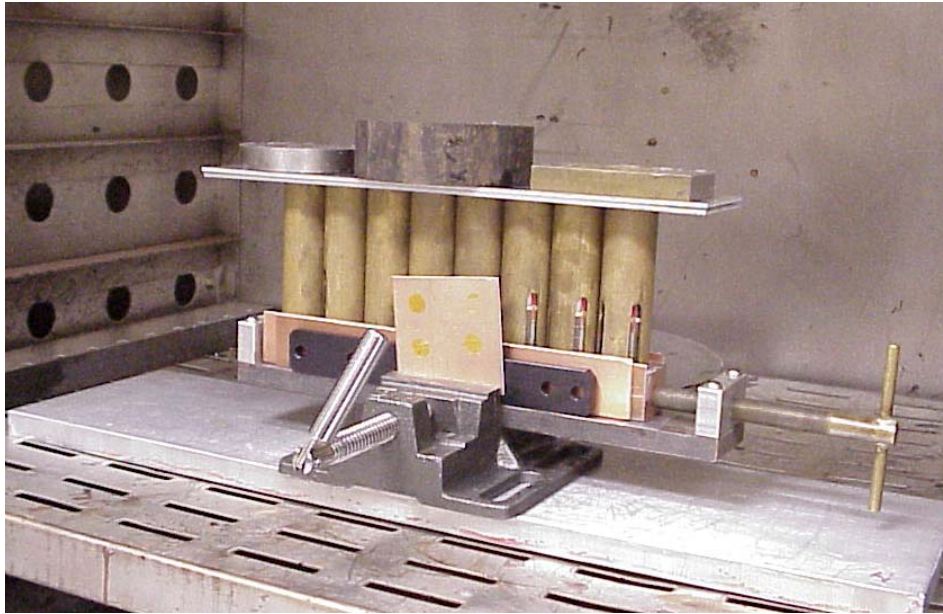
Photo of eight element line array mounted on a bar being held in a jig with the jig placed inside the oven shown in Fig. D.3.
